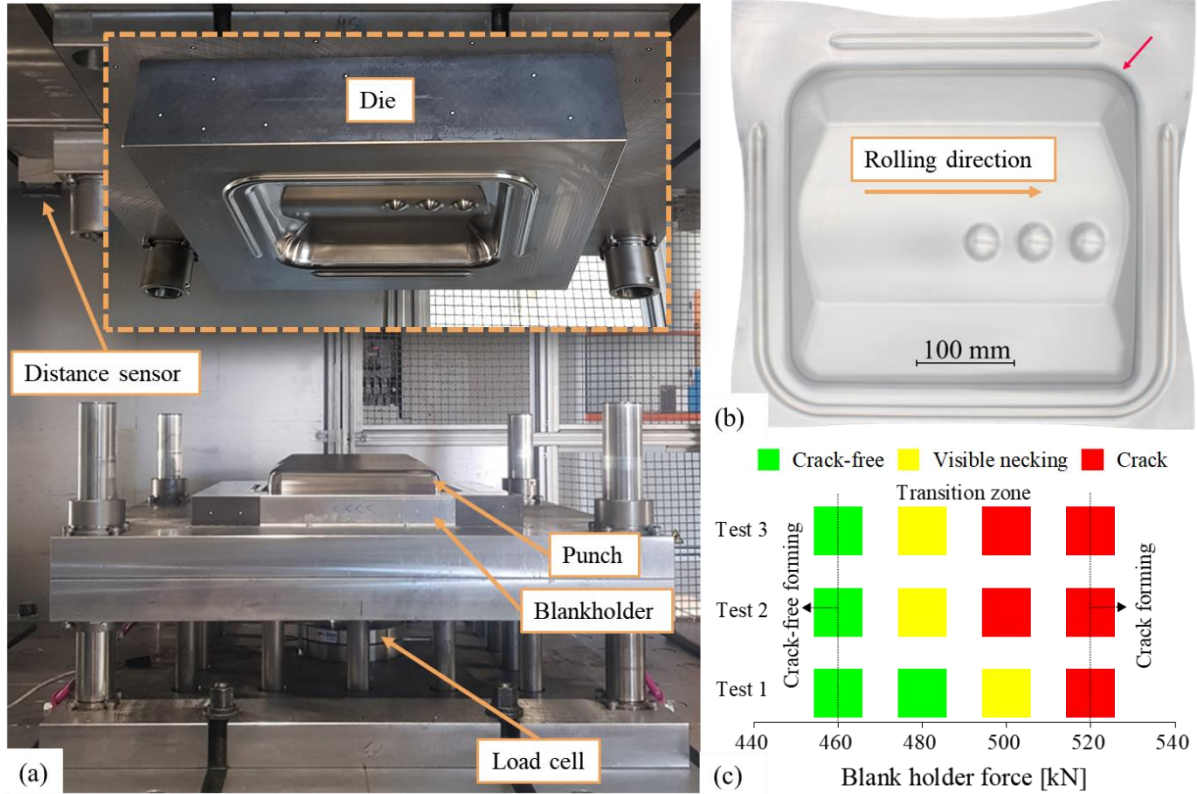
(a) A-Tool, (b) Blank component formed with the A-Tool and (c) formability characterization using the A-Tool
